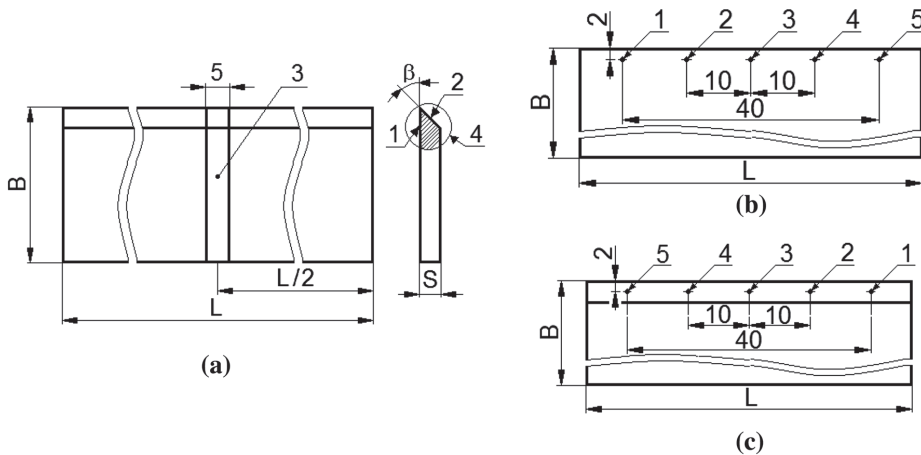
Wood milling tool: a dimensions, 1 rake face, 2 clearance face, 3 specimen, 4 area examined using microscope; b rake face, c clearance face; 1–5 location of hardness and roughness measurements
